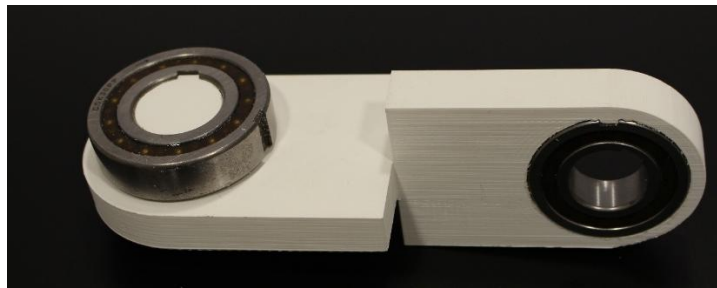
Full 3D printed housing assembly of Dual Axis one way bearing systems- mark 3
